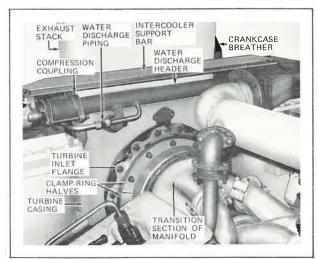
TURBO INSTALLATION DETAILS— TURBINE END, WITH SINGLE-PIPE EXHAUST MANIFOLD.
